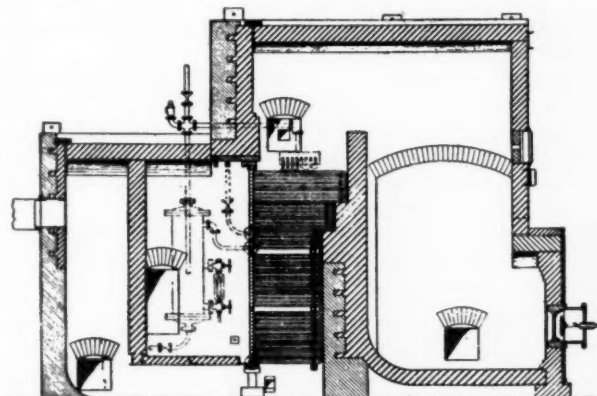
THIS BOILER, UPON WHICH EXTENSIVE TESTS WERE MADE, HAS NO DRUMS BUT CONSISTS OF THE ECONOMIZER PART OF THE BOILER SHOWN IN FIG. 3
